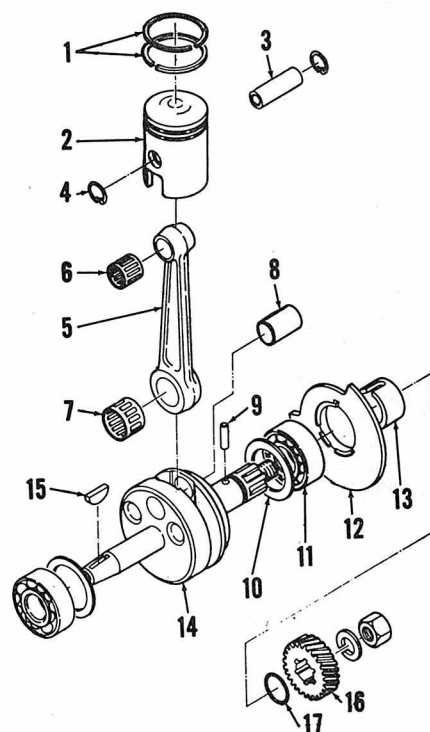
Exploded view of typical crankshaft assembly.
